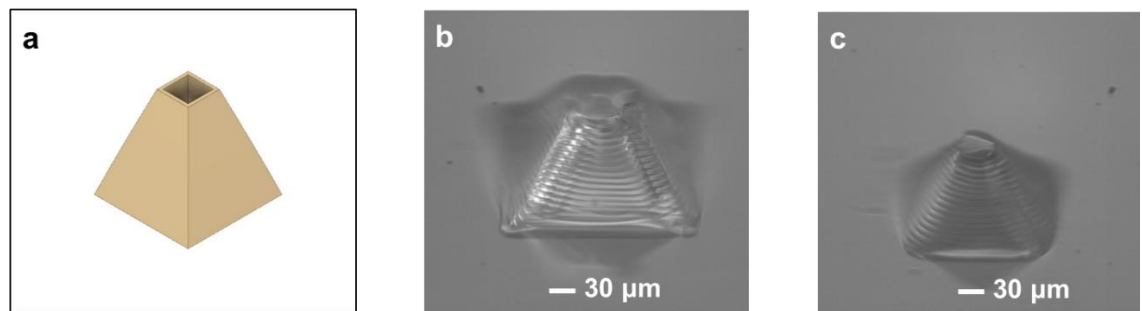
a.) Schematic of a pyramidal mould structure, b.) the printed mould and c.) Ecoflex moulding
